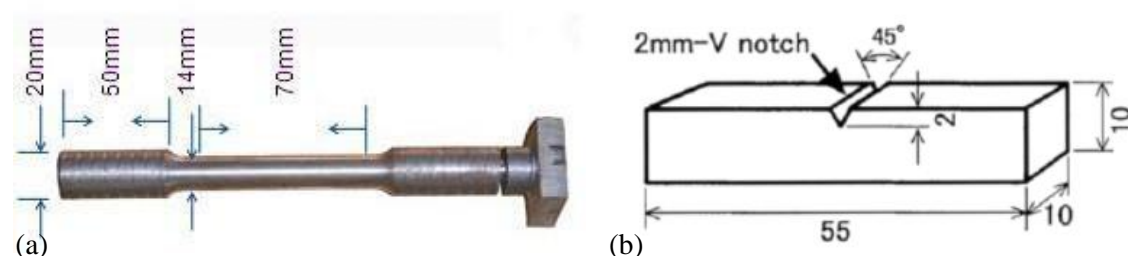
(a) Tensile test specimen after lathe machining and (b) V-notched Charpy impact test Specimen.
